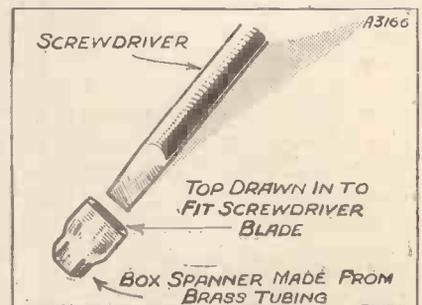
Here is a handy box spanner that can easily be made from an odd piece of brass tubing. The hexagonal end is shaped by hammering the tubing round a nut.
